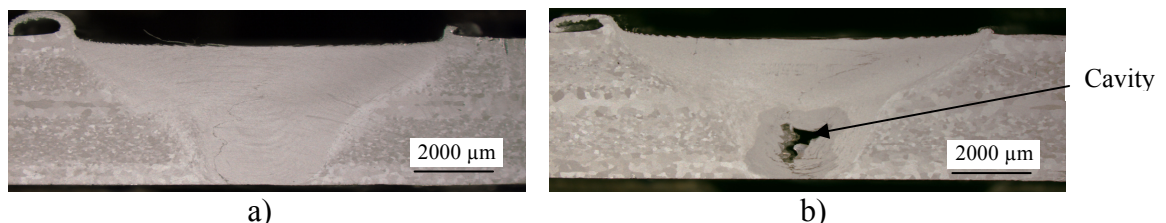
Metallographic cross section of friction stir welded aluminium without reinforcing elements a) without cavity b) with cavity
